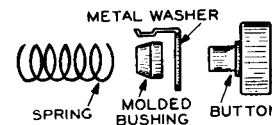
Putting a Hair Spring on a Push Button Shaft
